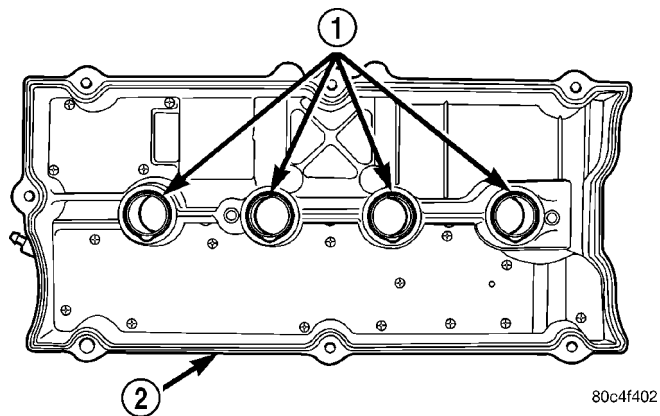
Cylinder Head Cover Gasket and Spark Plug Well Seals
